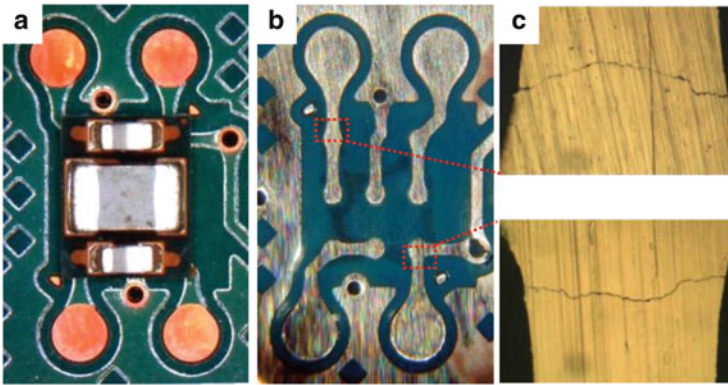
FA on a 2×3 module that failed at 559 drops in the drop tests: (a) shows the module mounted on the test PCB, (b, c) reveals the copper trace crack at two corner solder joints
